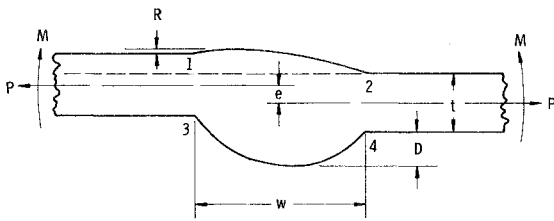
Weld bead geometry schematic: e = offset; R = reinforcement; D = drop through; t = thickness; w = width; P = load; M = moment; 2, 3 = tension; 1, 4 = compression.
